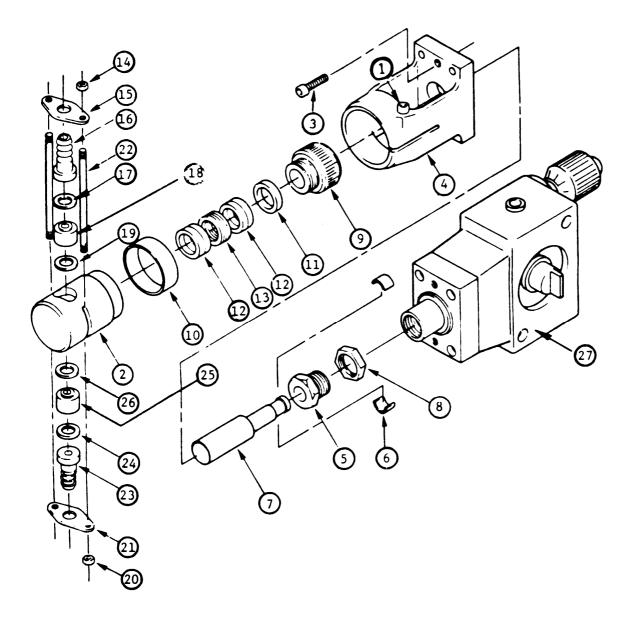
Chemical Feed Pump Head Assembly (ARMY)
